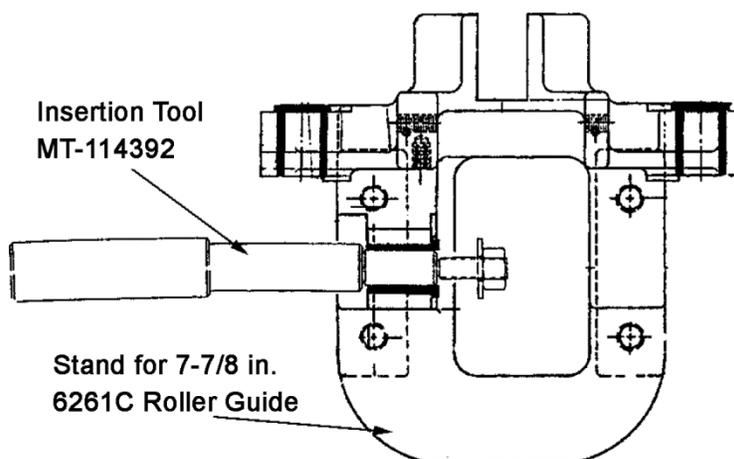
Insertion Tool p/n MT-114392 (for 7-7/8" guides)
